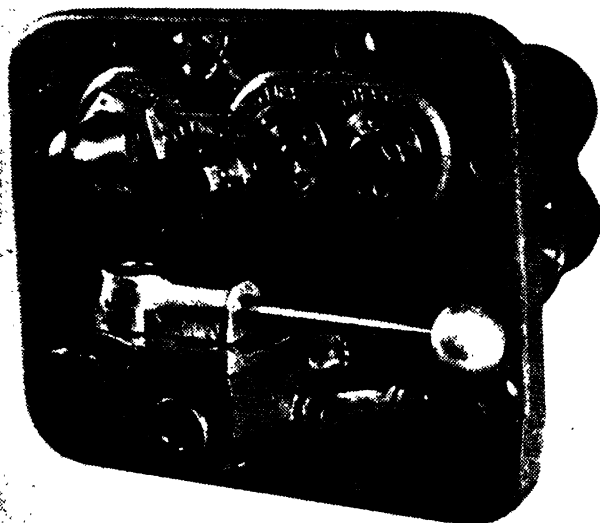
The 1-X control valve. (*The Sundstrand Machine Tool Co., Rockford, Ill.*)
